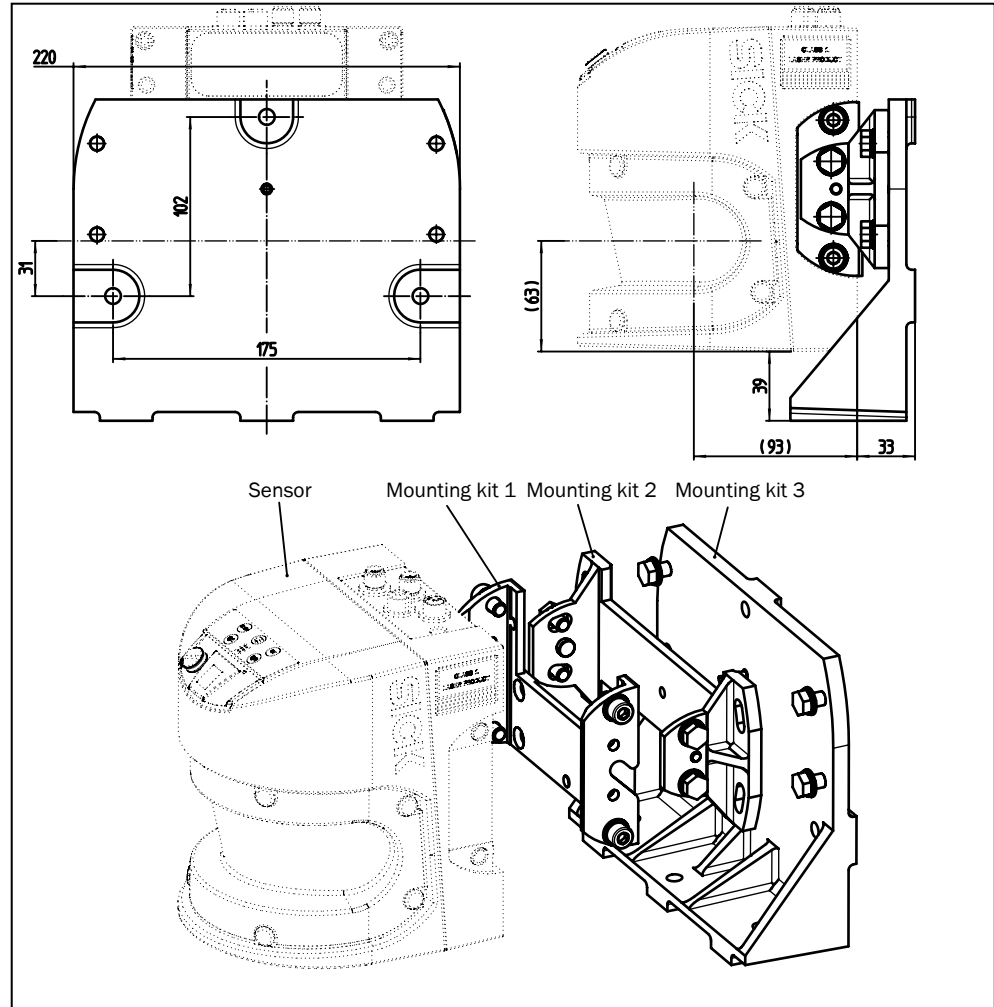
Dimensional drawing mounting kit 3 (mm)
